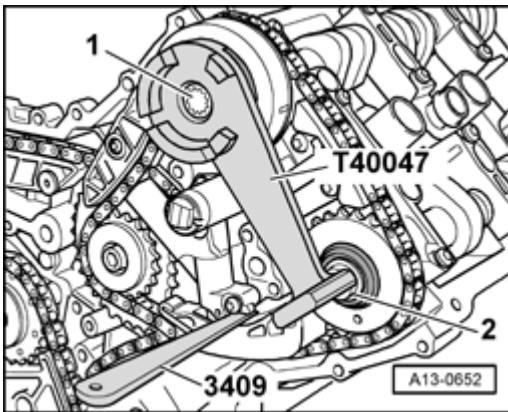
Securing Hall Sensor Wheel On Camshaft Adjuster Of Intake Camshaft Of Right Cylinder Head Using Setting Gauge T40047
